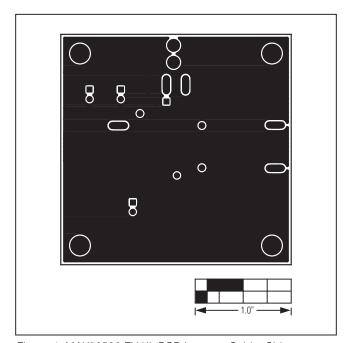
MAX98502 EV Kit PCB Layout—Solder Side
